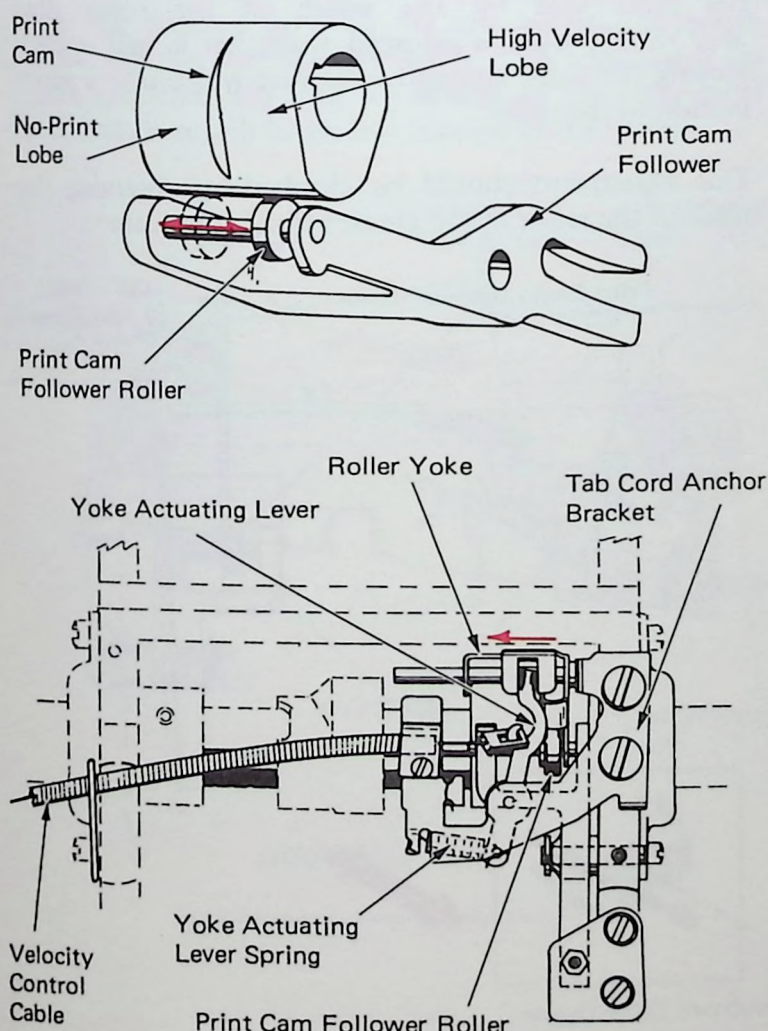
Yoke Actuating Lever And Spring (Bottom View)
